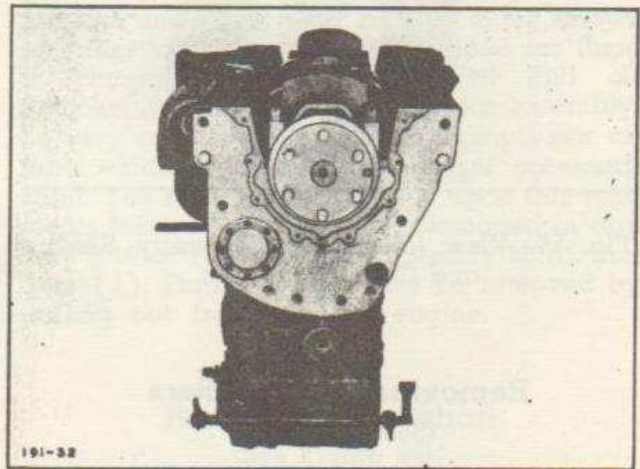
Rear View of Engine with Flywheel Housing and Oil Slinger Housing Removed
